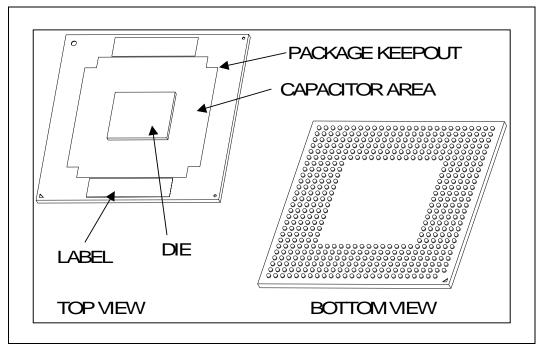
Micro-FCBGA Package Top and Bottom Isometric Views
